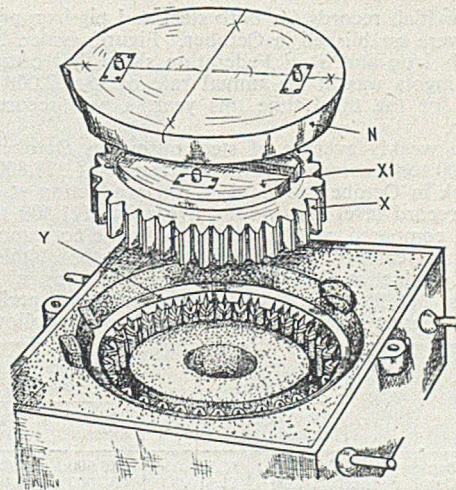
First Half-mould after Rolling Over, showing the sequence of Pattern and Stripping-plate removal.
